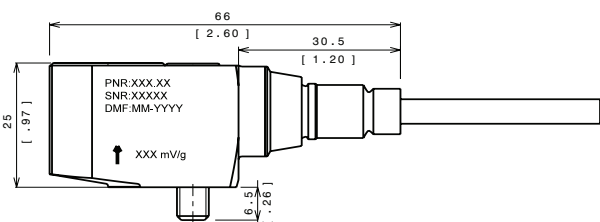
Outline drawing B=7 (cable with overbraid) electrical layout : See above B=5
